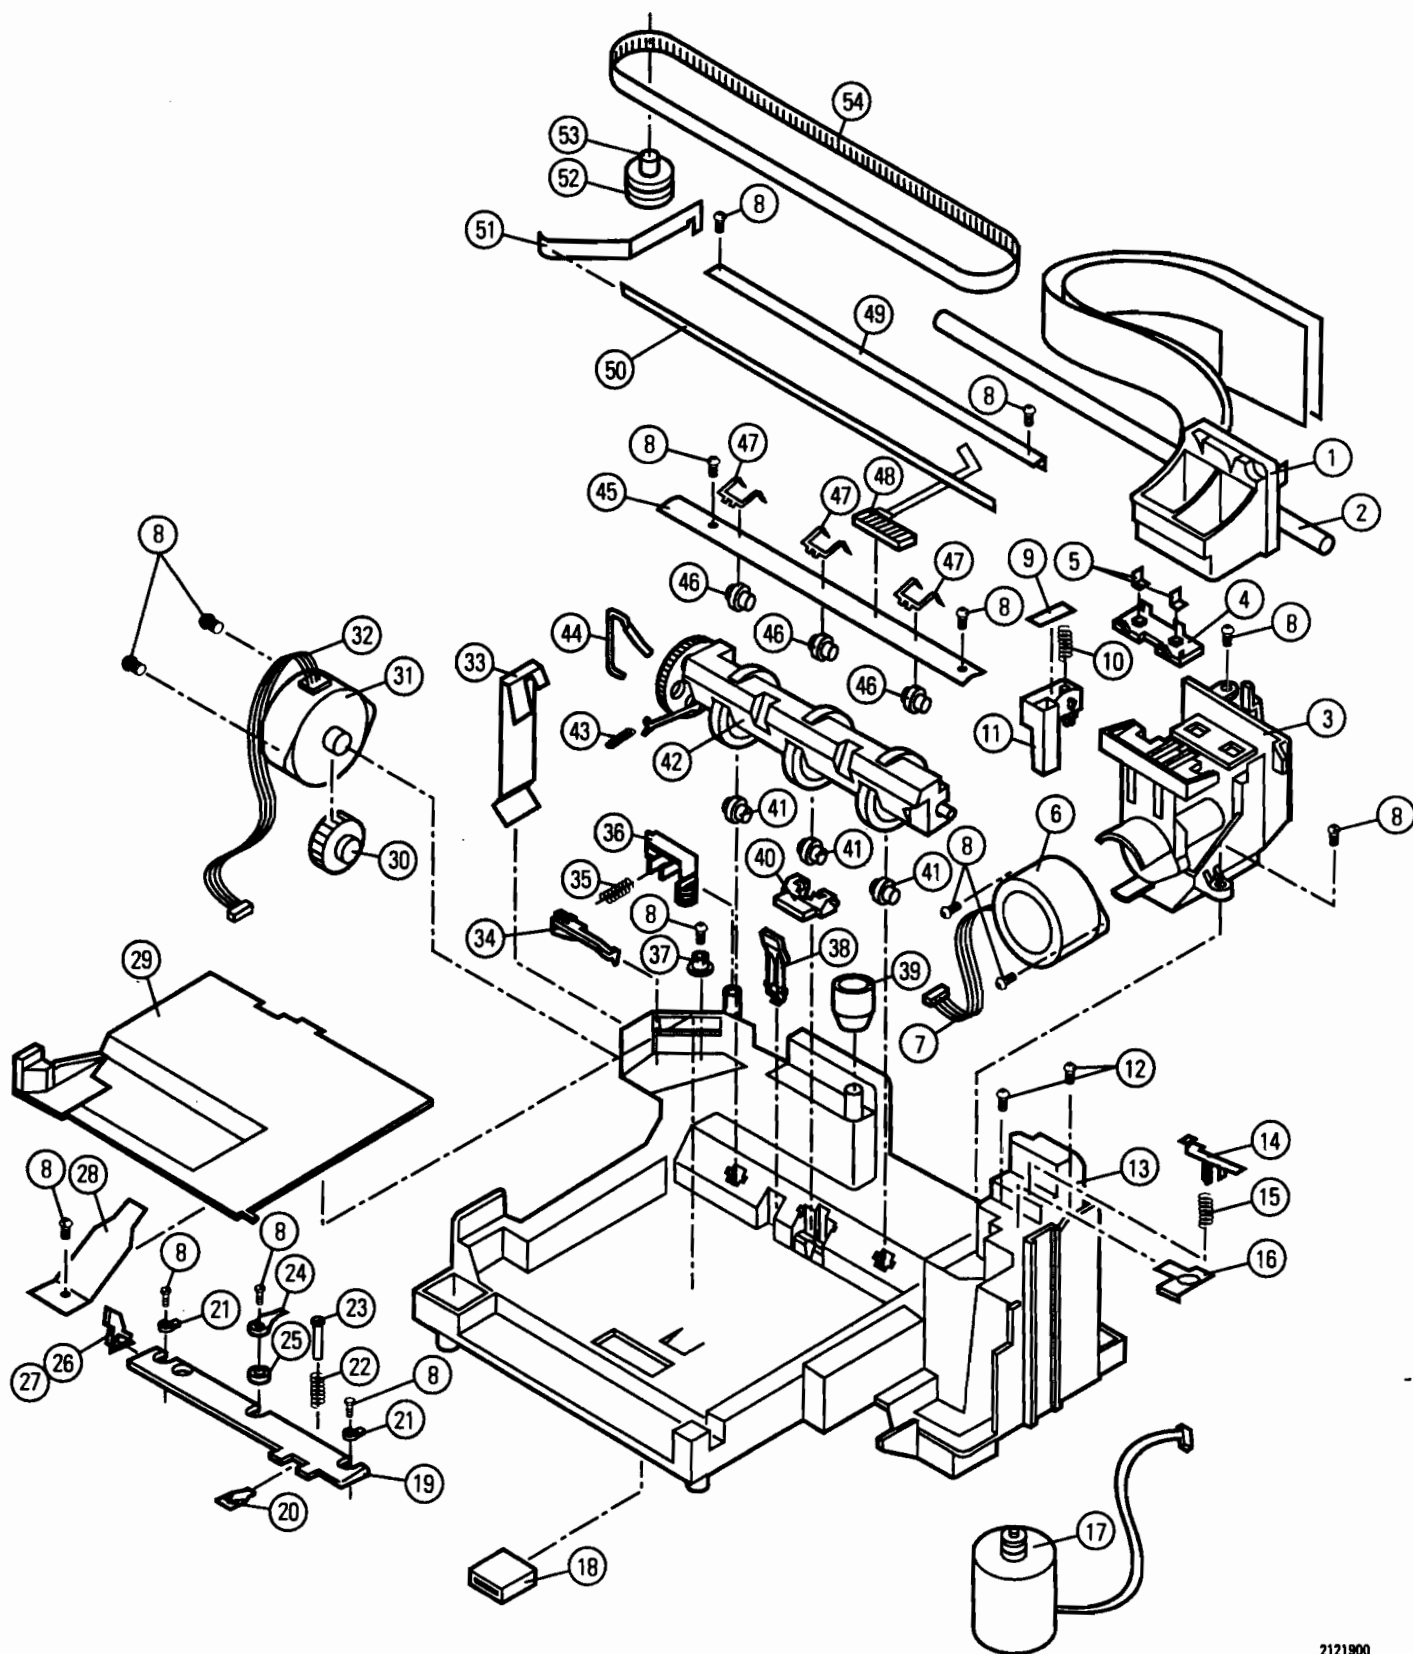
HP DeskWriter 550C Printer Mechanism Overall View
